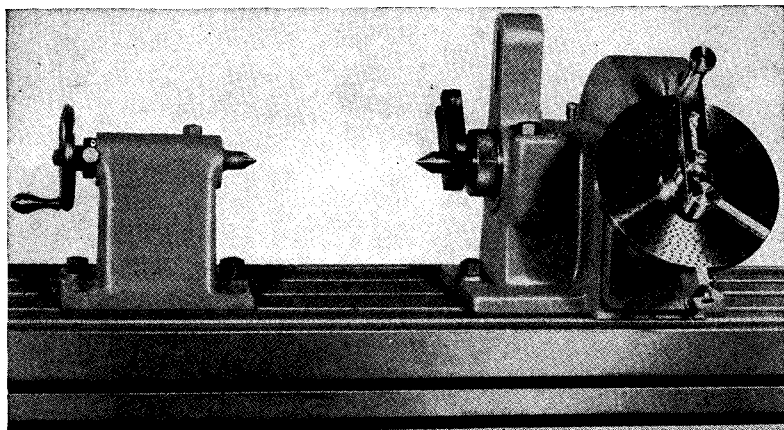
The gear-cutting attachment is used for spur-gear cutting and similar work. (The Cincinnati Milling Machine Company)
